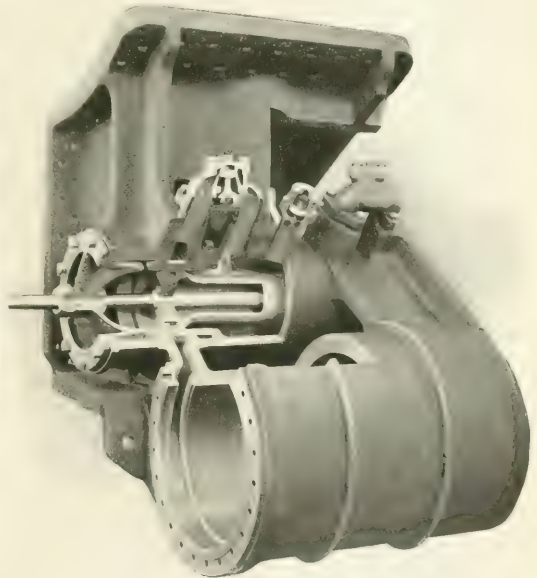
PISTON VALVE AND BY-PASS VALVES
